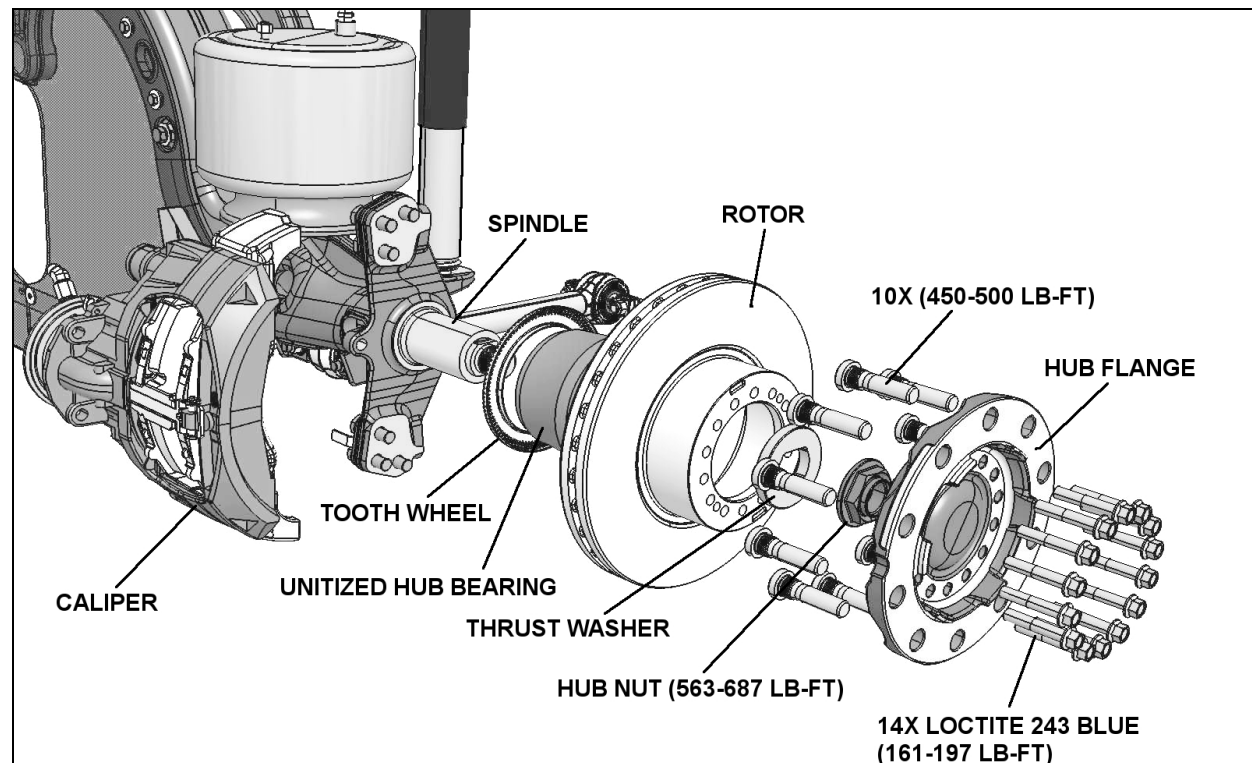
FRONT & TAG AXLE HUB AND ROTOR ASSEMBLY
